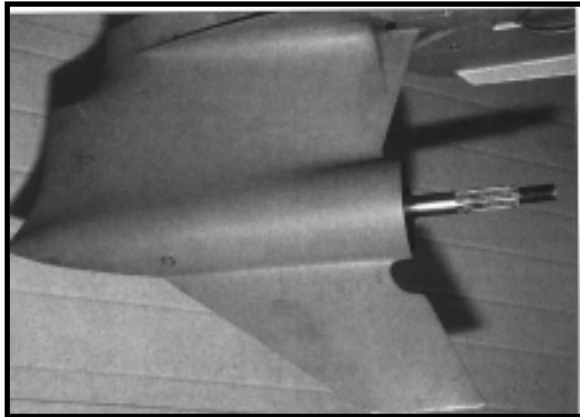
Fastest finish for gear cases is buffed primer paint
